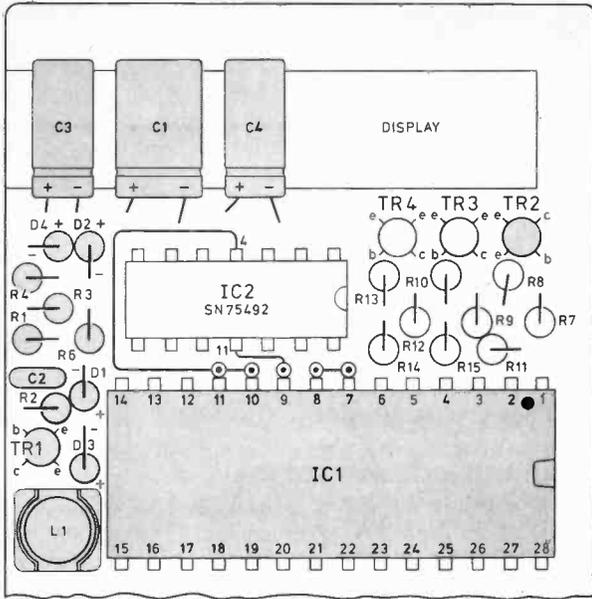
Component layout of the Sinclair calculator. The shaded components should be removed (see text)
